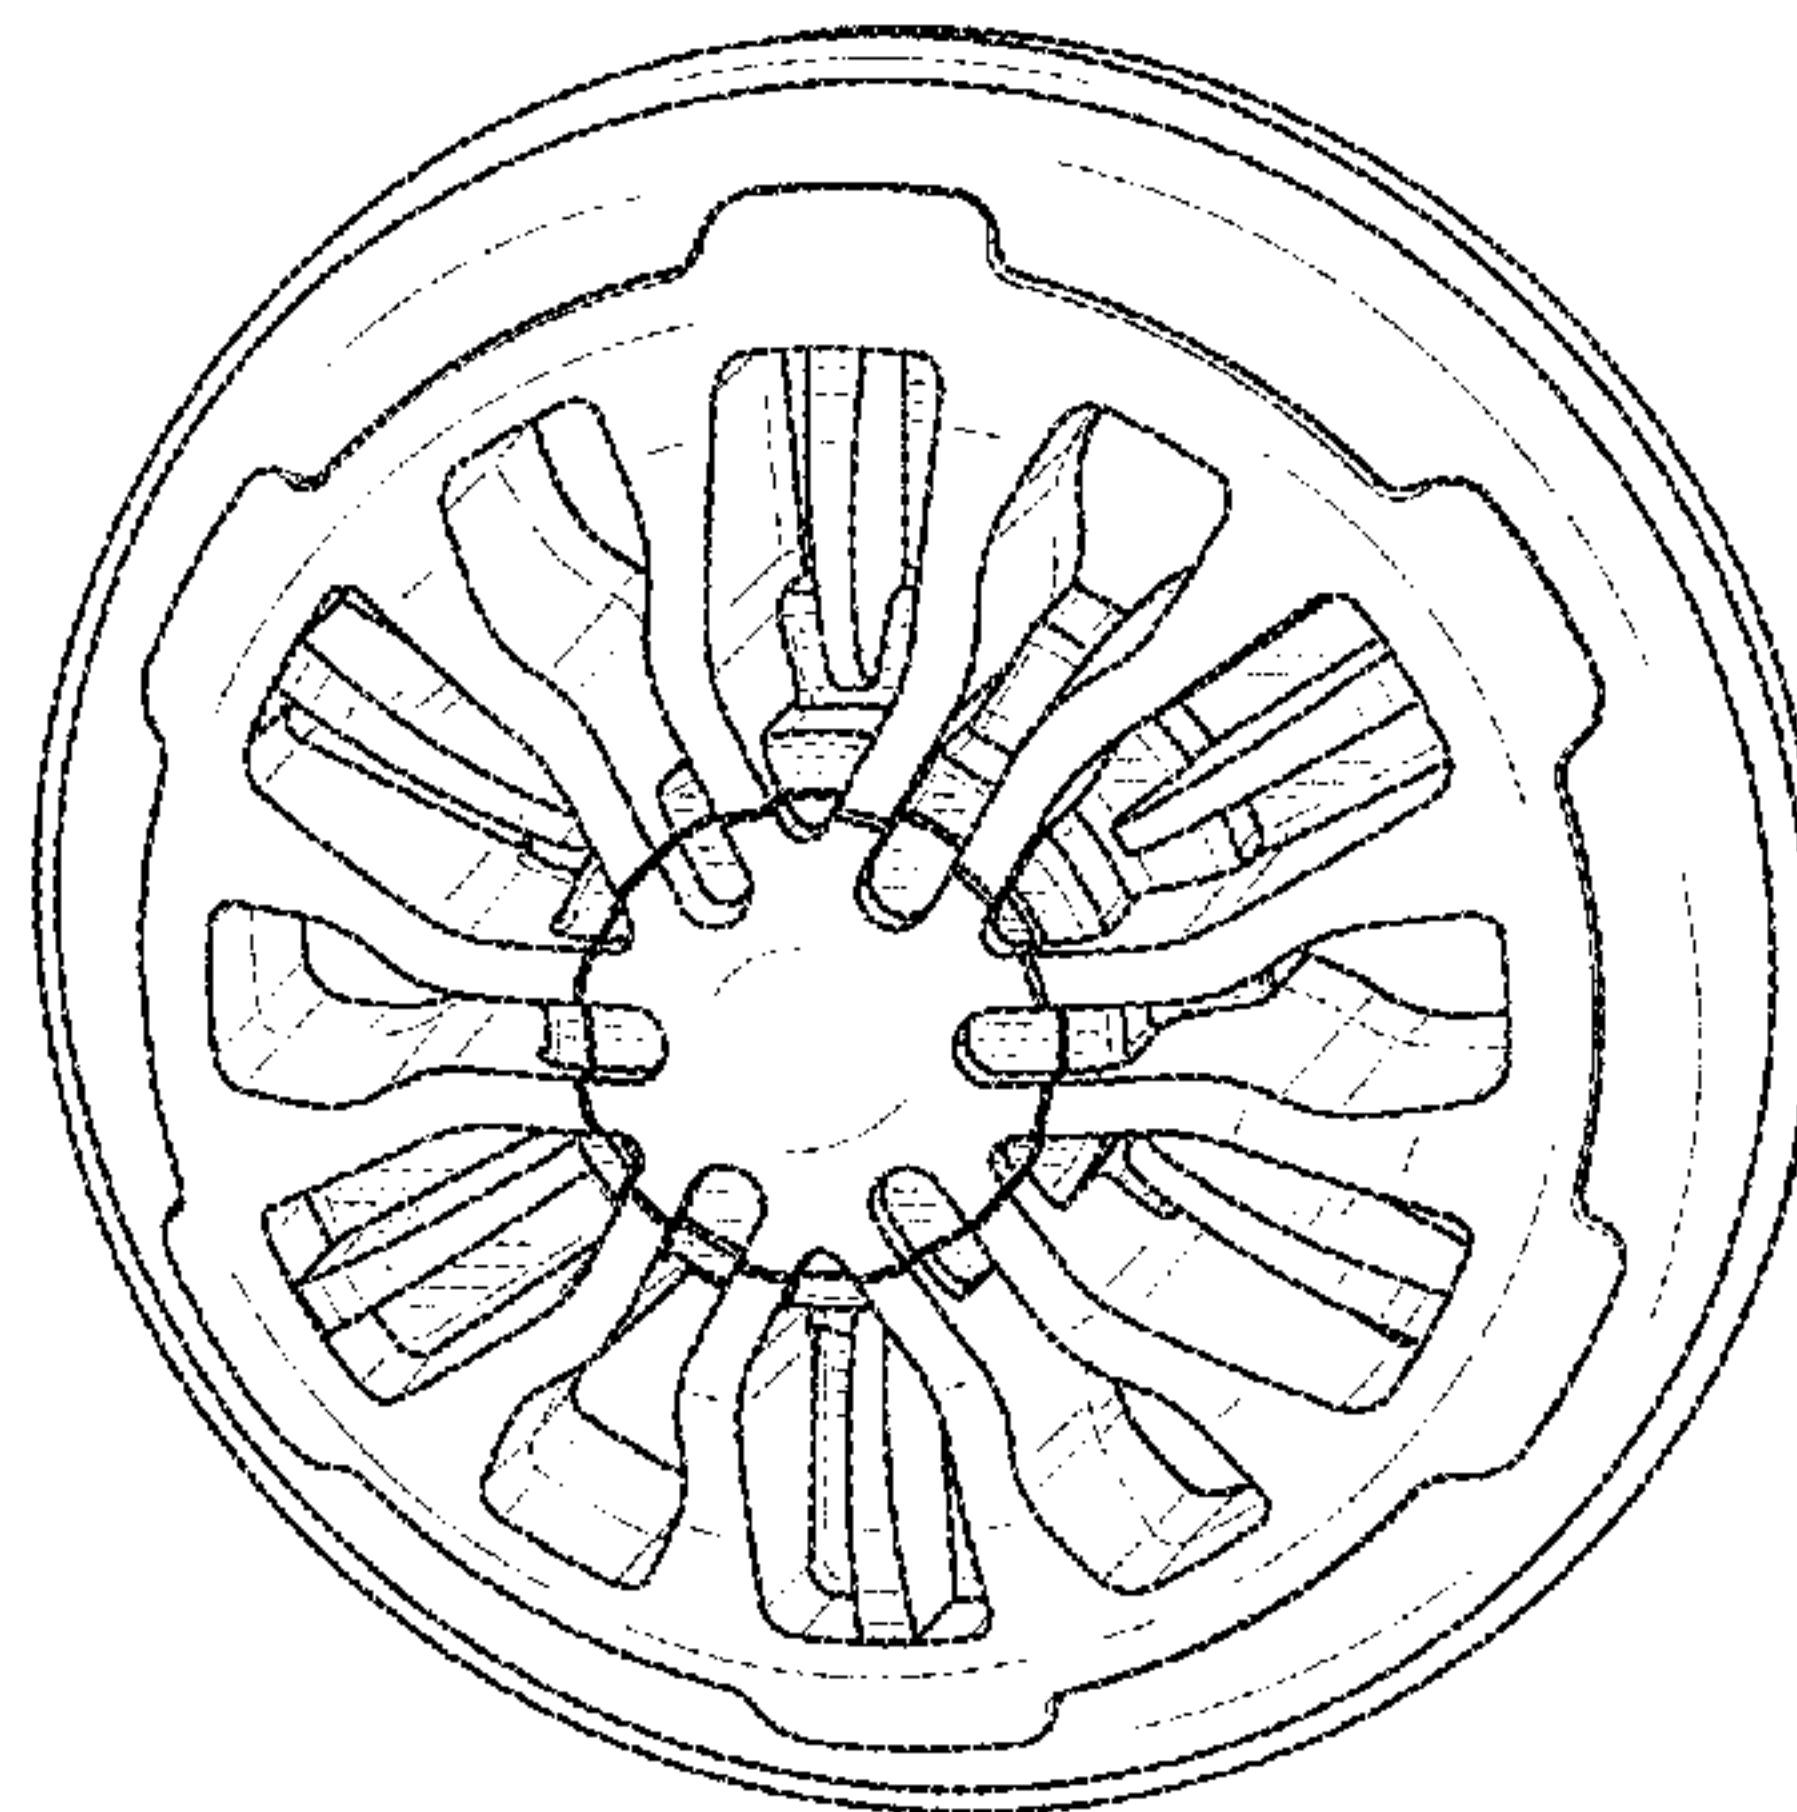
shows a right elevation view of the luggage wheel of FIG. 1;
